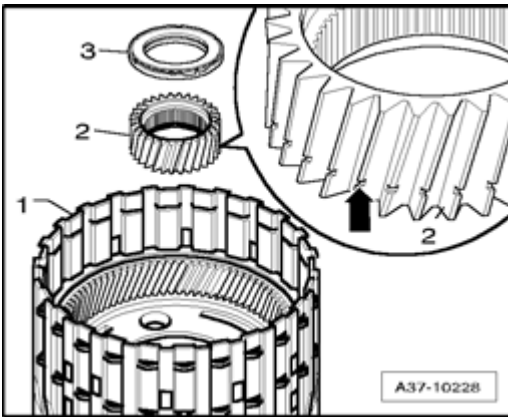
Axial Needle Bearing, Sun Gear And Ring Gear "I"
